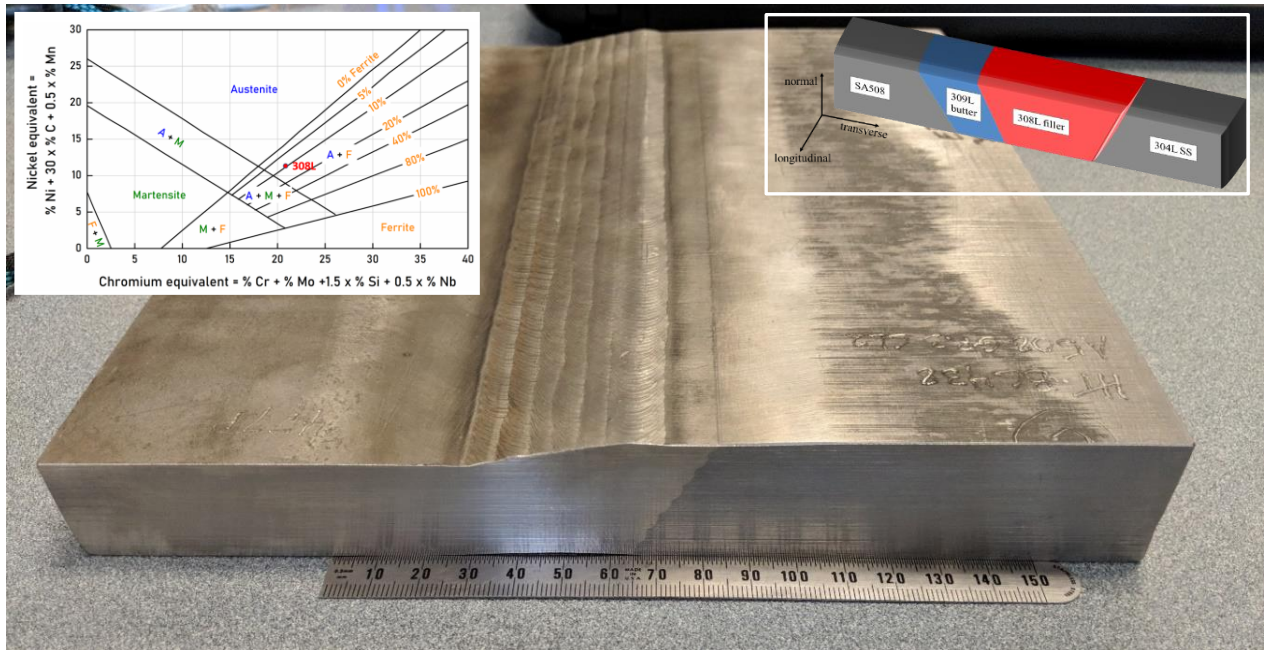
The SA508-304L weldment fabricated by EPRI used for this study. The SA508 on the right is thicker and the serrated interface between this material and the 309L butter is observable on the side of the weldment. This is one edge of the 309L dilution zone. Left inset: The Schaeffler diagram showing the location of the 308L filler. Right inset: Schematic illustration of the weldment showing the normal (N), longitudinal (L), and transverse (T) directions. The transverse direction is orthogonal to the weld (L) direction.
